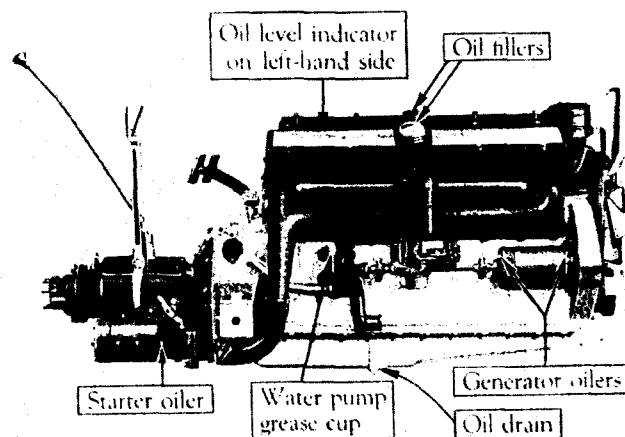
Showing the location of the oil filler, oil level indicator, oil pan drain plug and other lubrication features.
